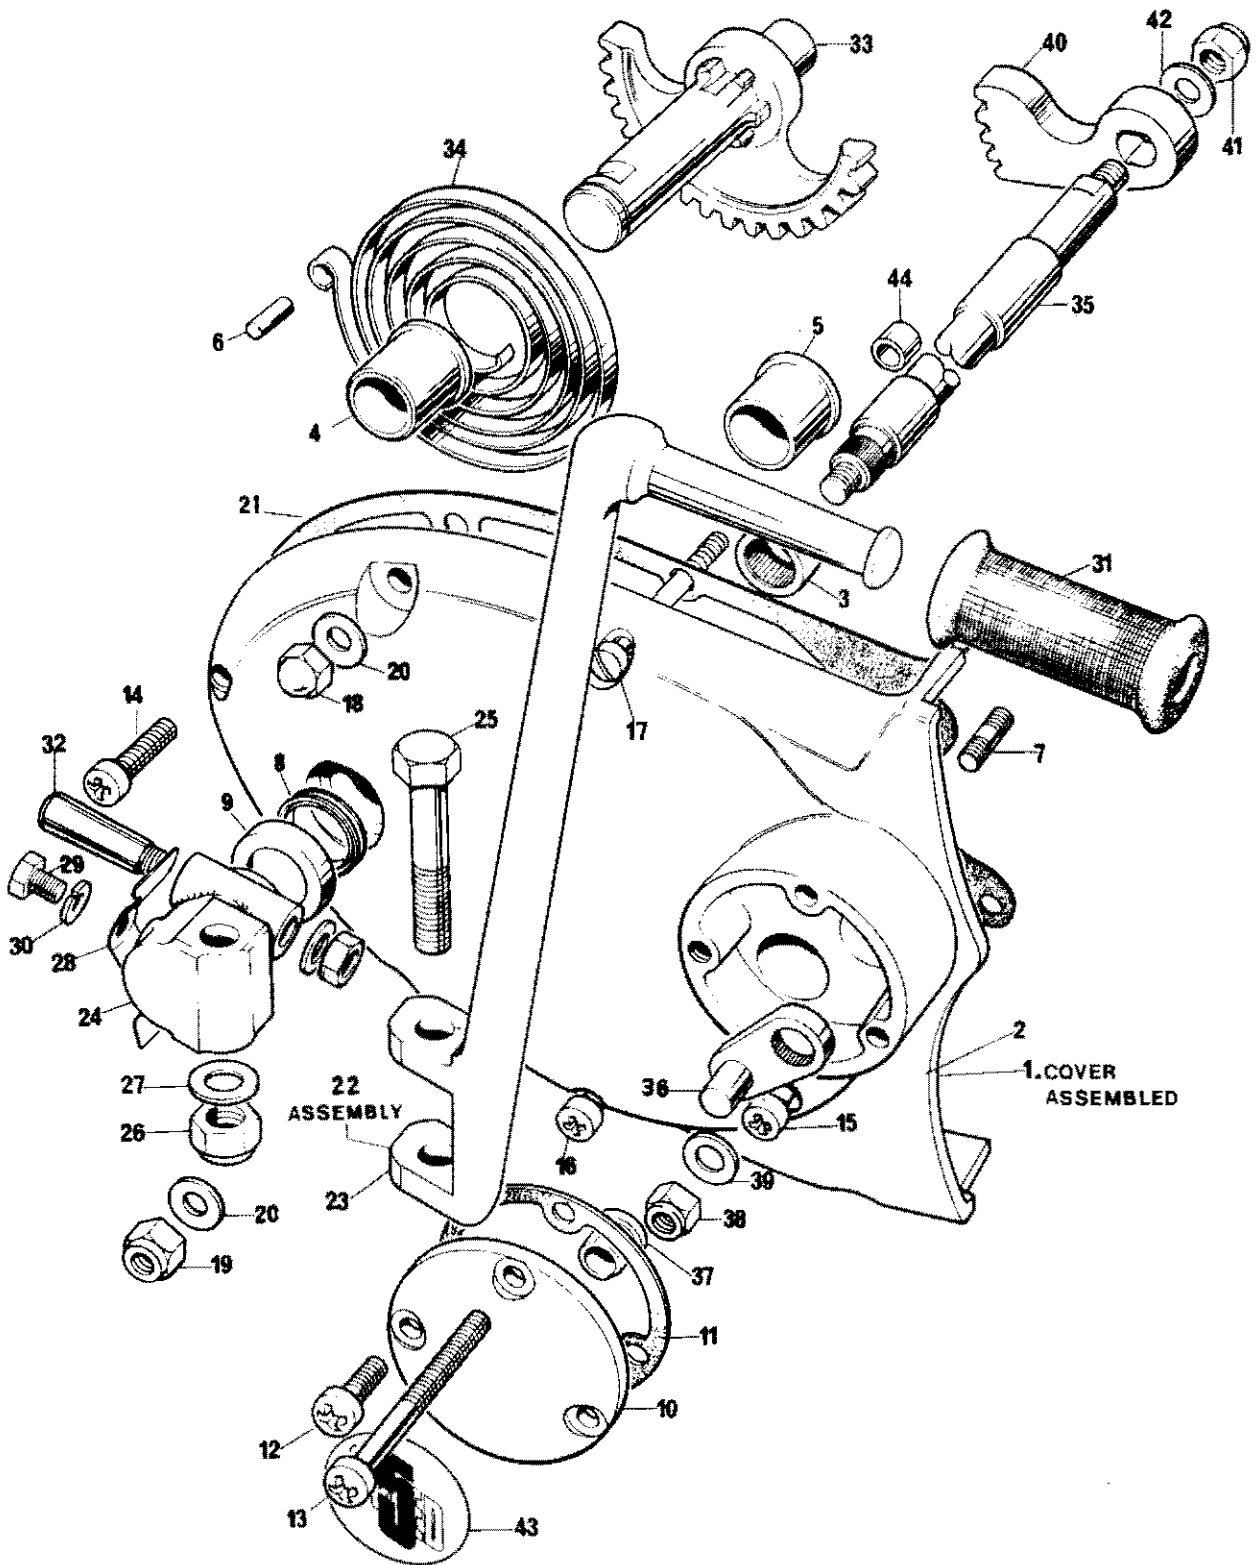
TRANSMISSION (GEARBOX) OUTER COVER, GEARSHIFT LINKAGE AND KICKSTARTER PEDAL
